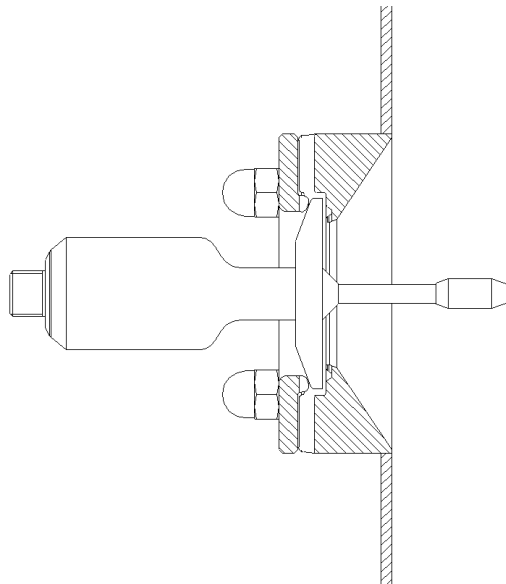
Example of an installation on a tank using or flush sensor design with a flush type weld-on connector.
